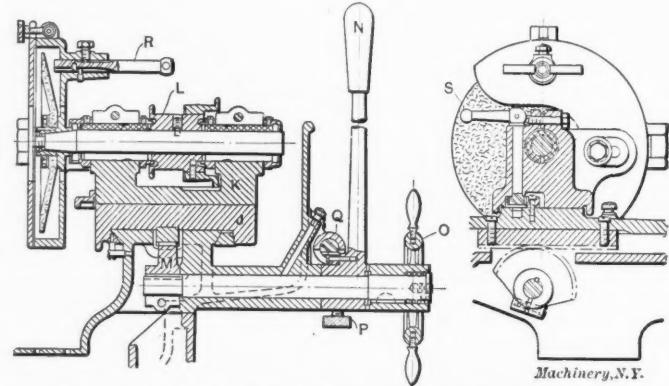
, Side View, and Fig. 5, Cross-section of Wheel Head-stock, Slide, etc., showing the Movements and Adjustments.
